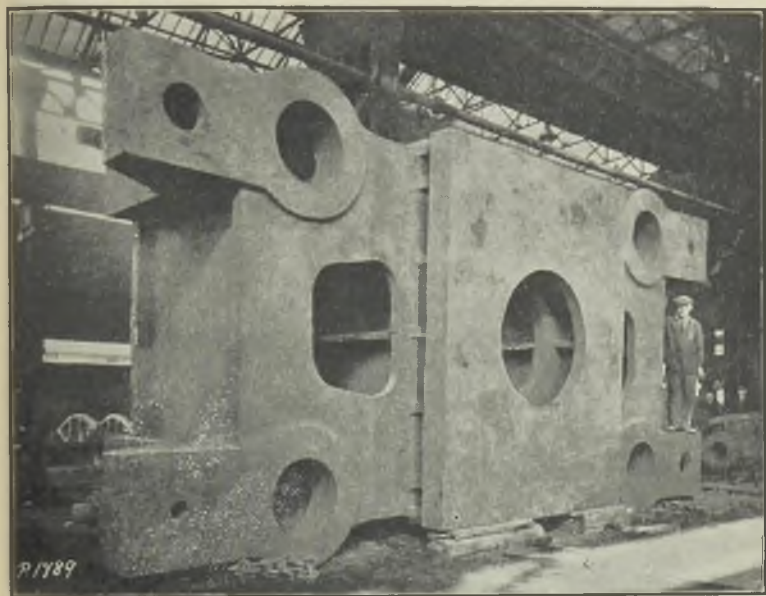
80-TON STEEL PRESS CASTING, READY FOR MACHINING.
